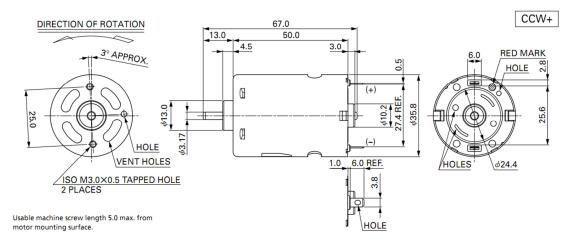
Dimensions of electrical motor RS 540(Mabuchi Motor 2010)
